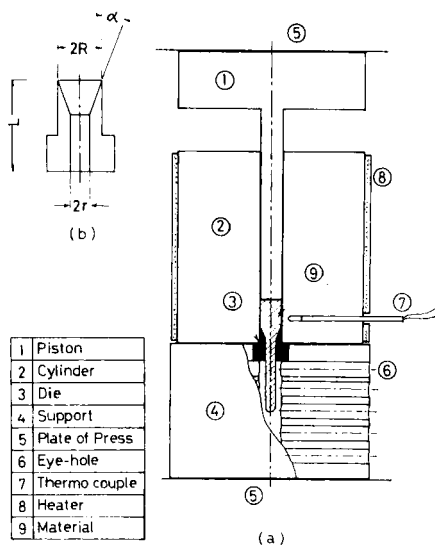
Schematic representation of extrusion device. (a) piston, cylinder and die assembly, (b) vertical section of die.
